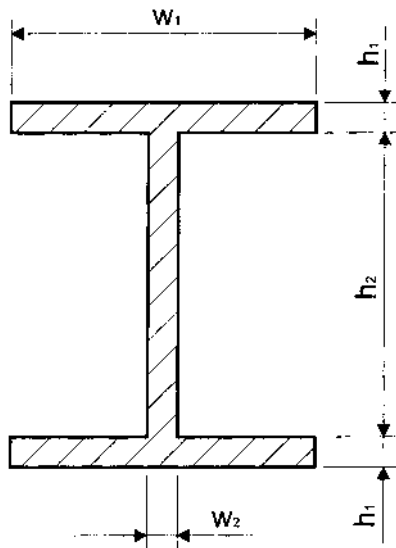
Simple I-beam originally in use in helicopter decks and manufactured through the processes of rolling and welding.
